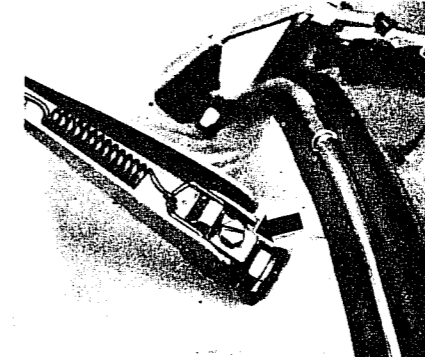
Wiper arm clamp screw (Late models have a splined spindle.)
